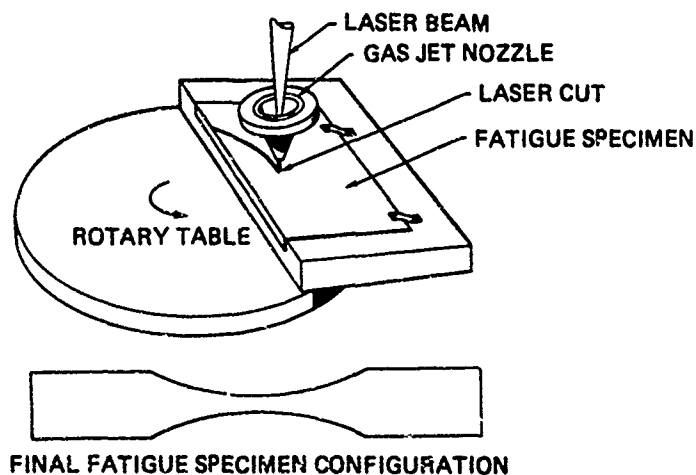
Fixturing for Laser-Cut Fatigue Specimens
